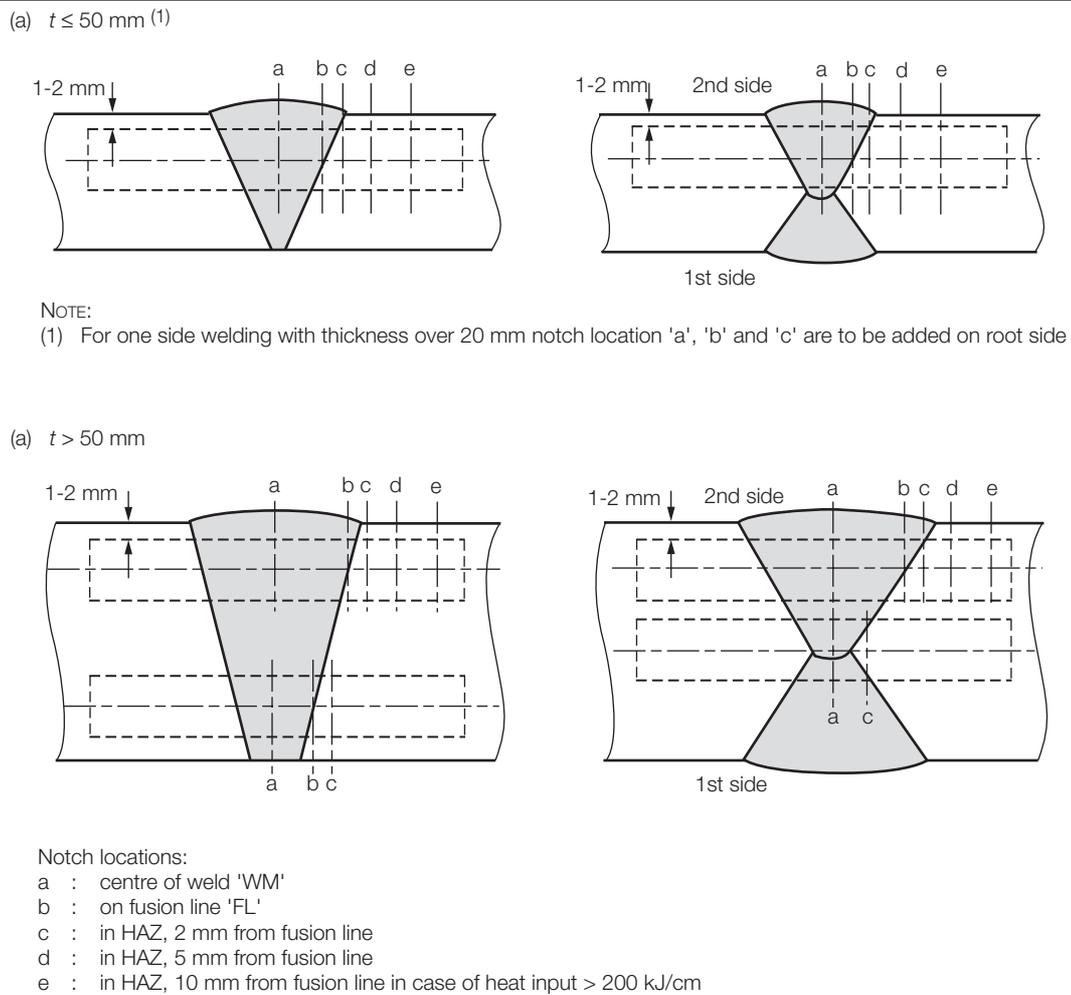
Locations of V-notch for butt weld of high heat input (heat input > 50 kJ/cm)
